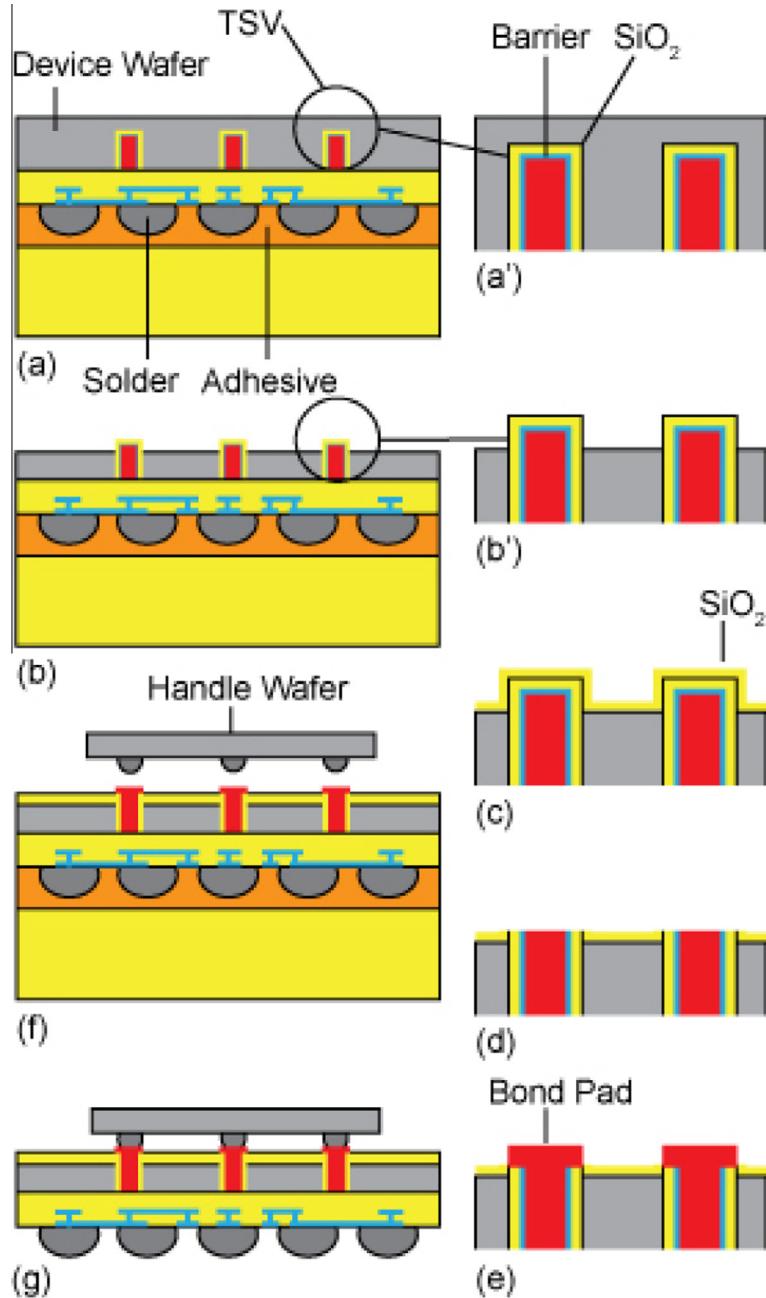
Process flow for backside TSV wafer processing; (a) Si thinning; (b) Si recess etch; (c) insulator deposition; (d) planarization to expose TSVs; (e) bond pad formation; (f) die attach; (g) remove handle wafer after [102].
